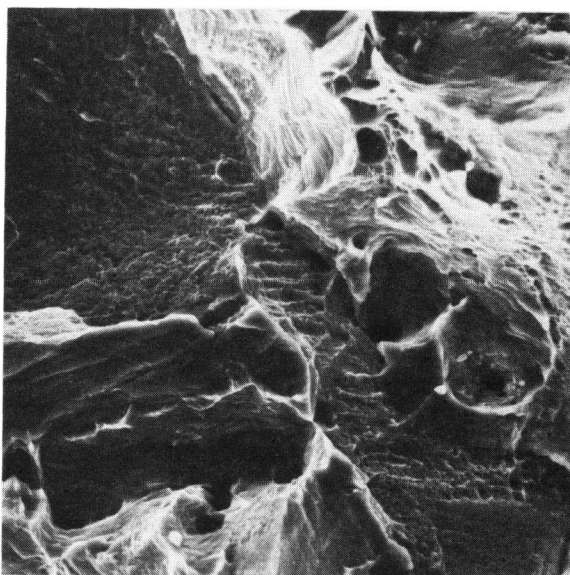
Fracture surface produced by ductile overload (x 750)
